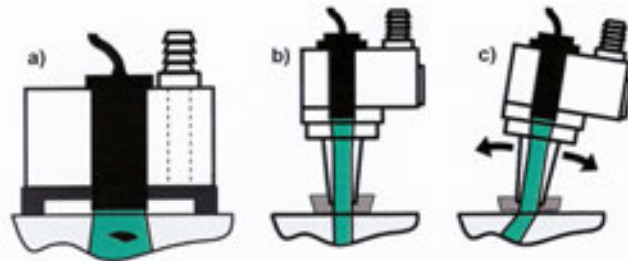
Gap and Jet Coupling, a) gap coupling, used for lamination and strip testing with single or dual- element probes, b) wear-free jet coupling with straight-beam incidence, c) jet coupling with angular incidence for high-speed weld inspection and convenient angle adjustment.
